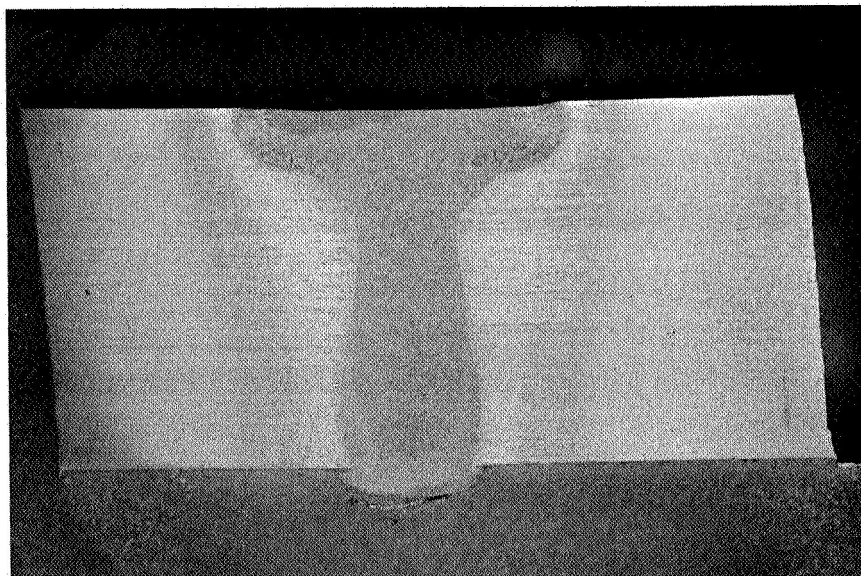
Out-of-Vacuum Electron Beam Weld in
